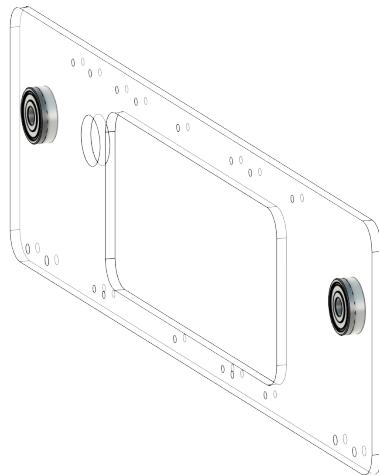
Rear acrylic support with embedded bearings. Glue is recommended for a press-fit.
